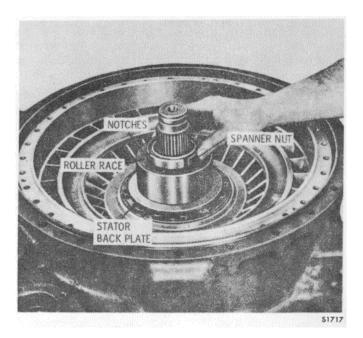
Installing Freewheel Roller Race Spanner Nut
